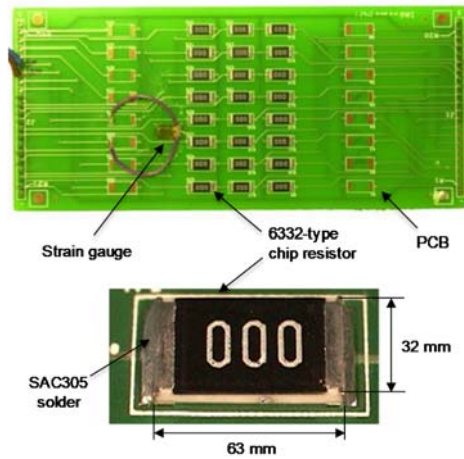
Detail of a test coupon and a single leadless chip resistor assembly
